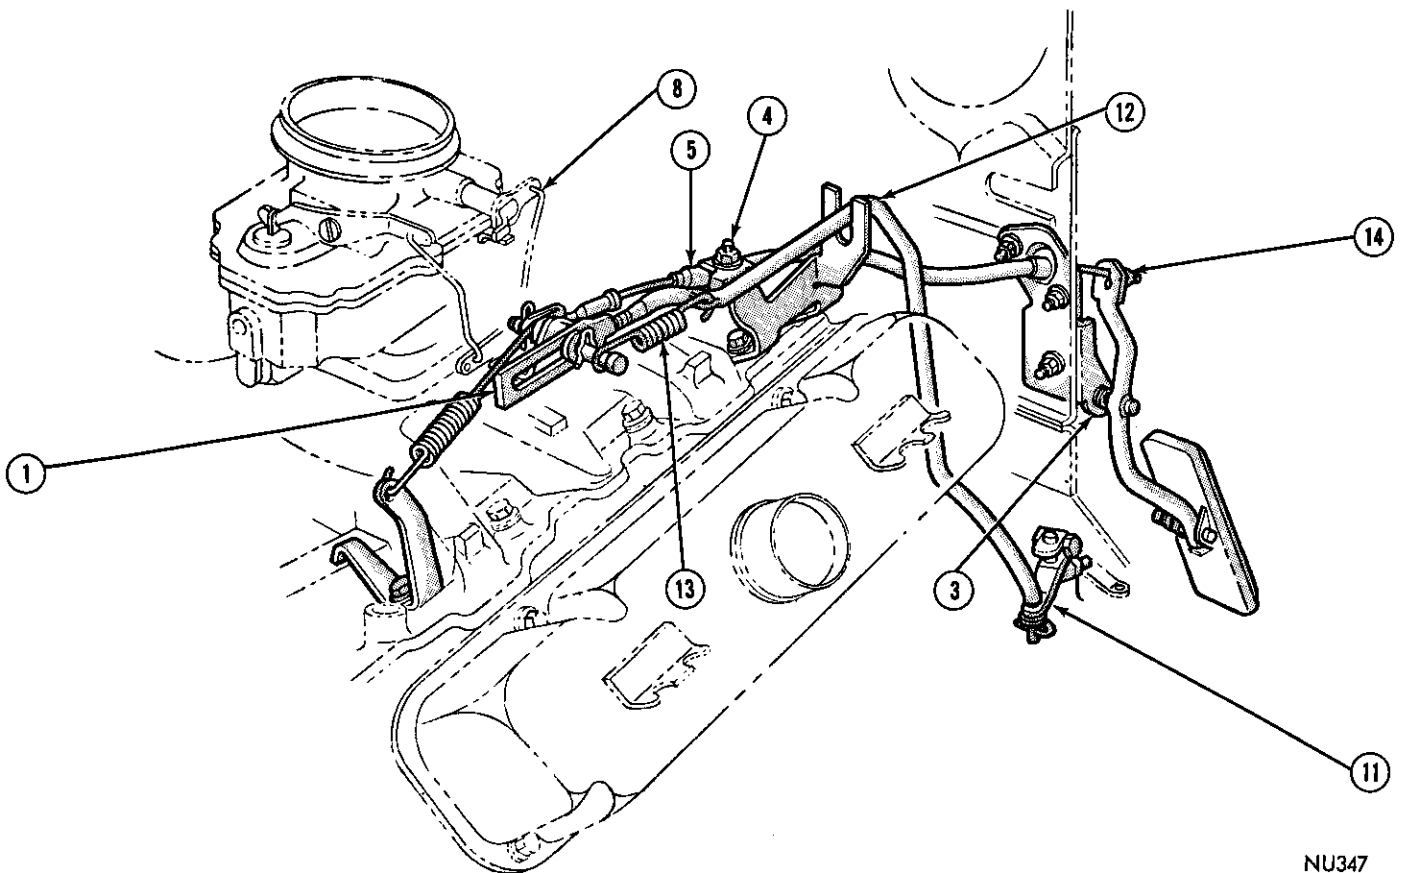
Throttle Linkage Adjustment (383 and 440 Engines)
